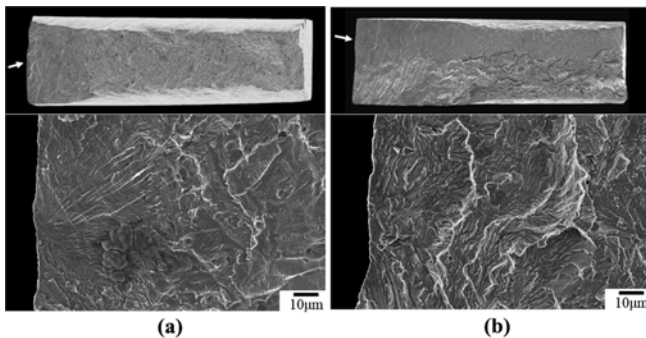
The SEM fractographs of Fe15Mn welded joints fatigued at (a) 298 K/480 MPa and (b) 110 K/500 MPa.
